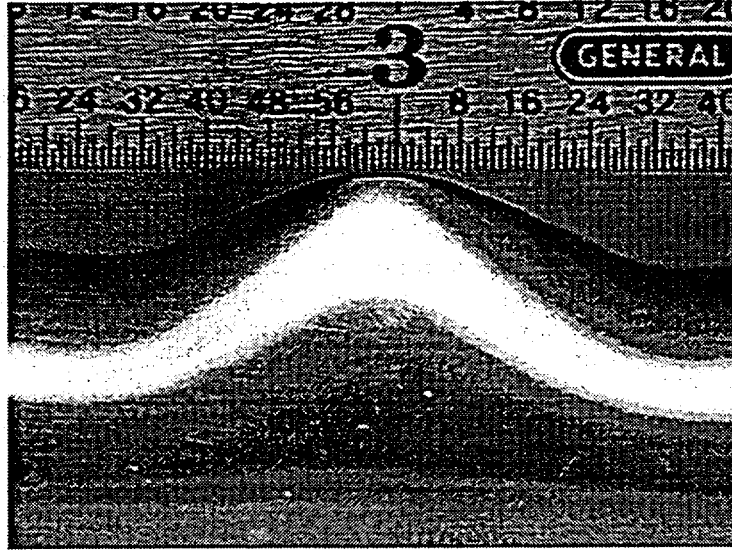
Side view of tube specimen shown in Fig. 4.18, showing three-dimensional bulging at failure site.
